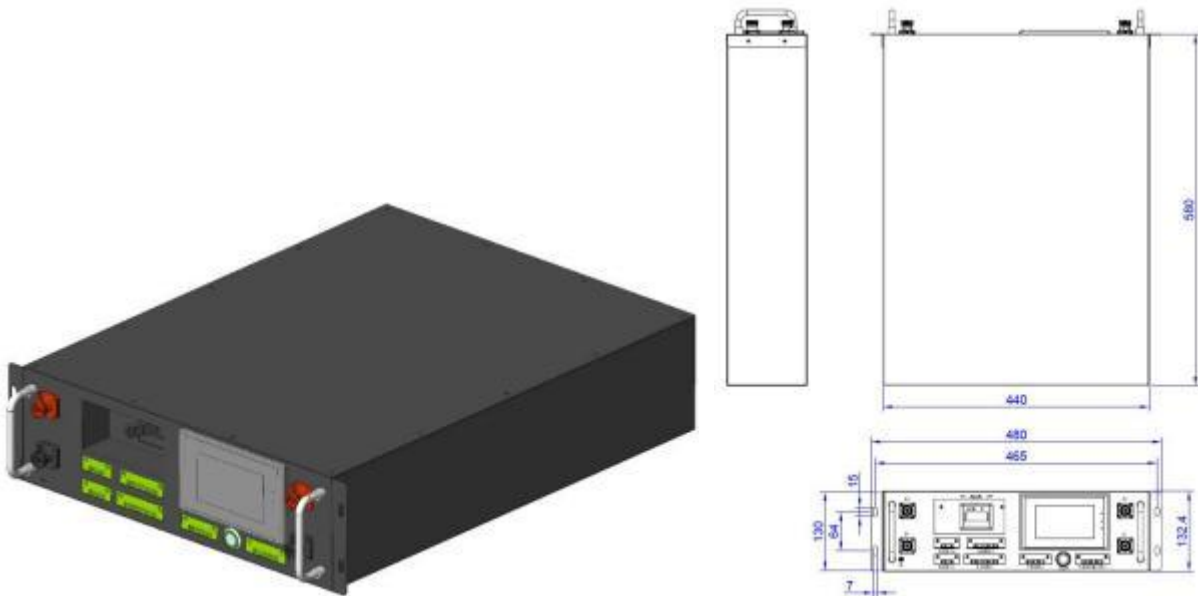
1 - 1 Appearance and Dimensional Drawing of High Voltage Box
